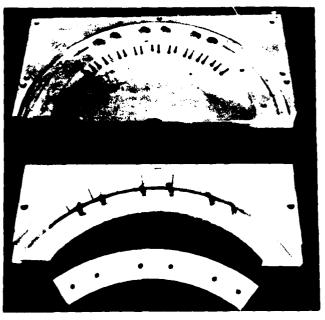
Head-plate and base-plate with auxiliary pressure blocks and clamping plates.
